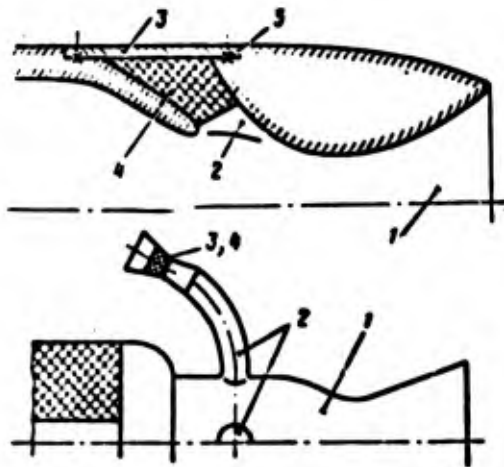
Two thrust-reversible arrangements. 1) Main nozzle; 2) additional reversal nozzle; 3) caps; 4) heat insulation; 5) break-away charge.
